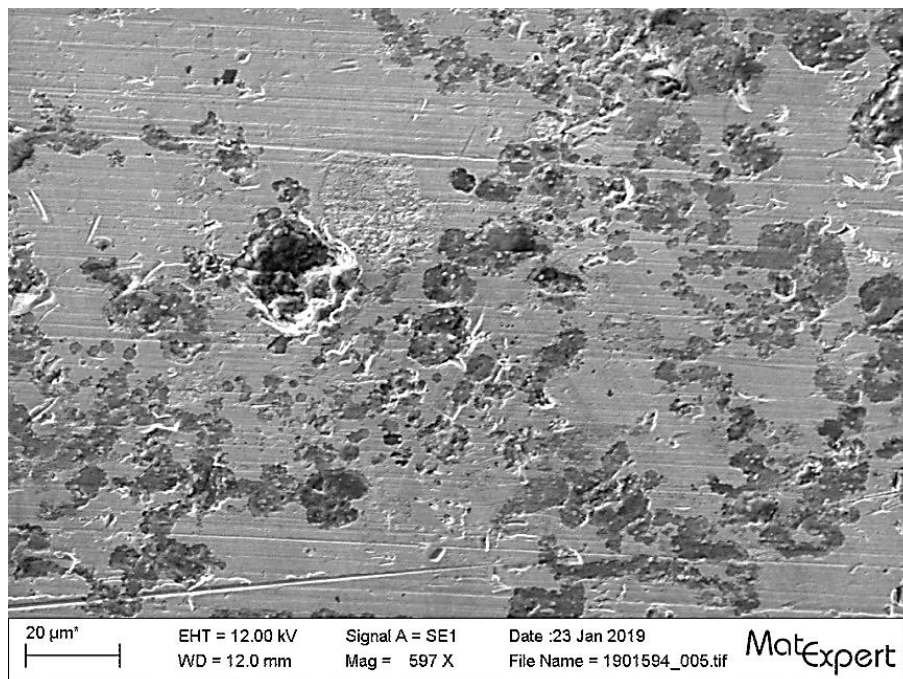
Ball bearing from the centre engine, inner-race bearing track – corrosion.
